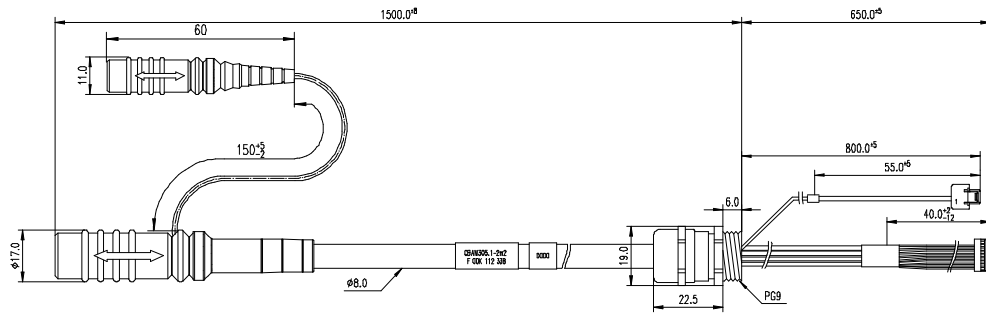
CBAM305.1-2m2 Cable - Dimensions
